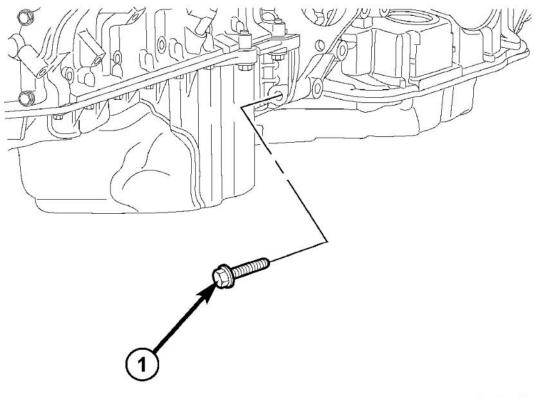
Remove/Install Transmission to Engine Bolts Courtesy of CHRYSLER LLC
